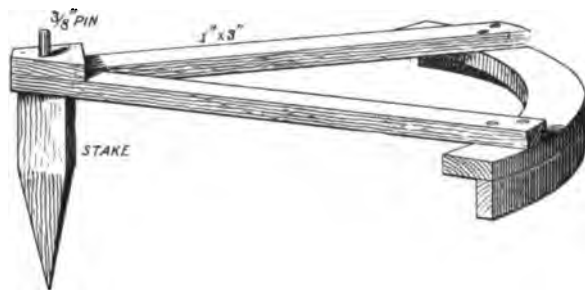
Sectional Pattern for Molding a Circular Casting.
